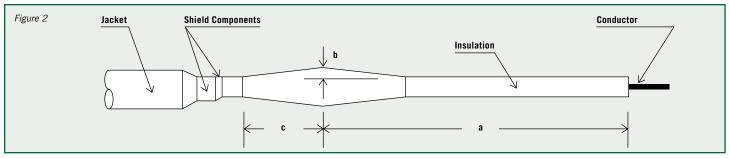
shows "rule-of-thumb" dimensions for terminating cables with an extruded insulation.
